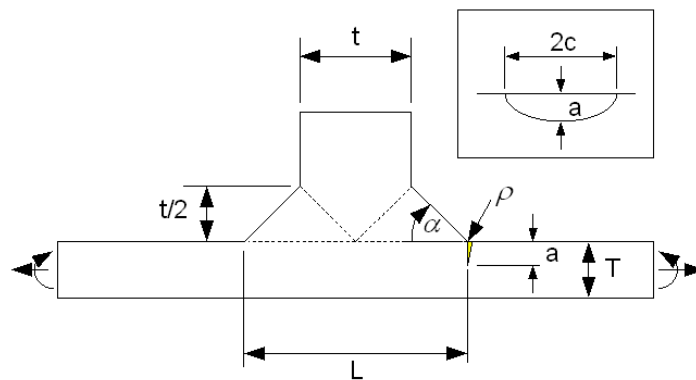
T-butt geometry containing surface crack at weld toe
